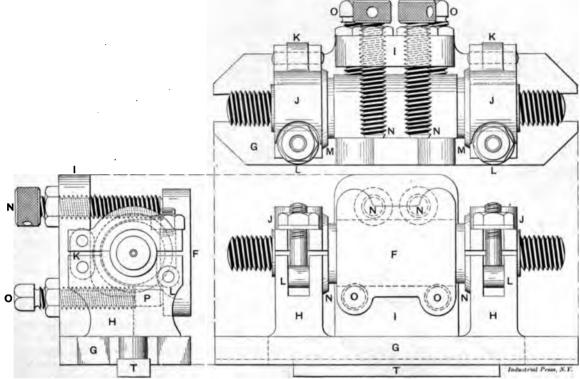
Fixture for Face Milling the Flat Surface of the Work shown in Fig. 1.
